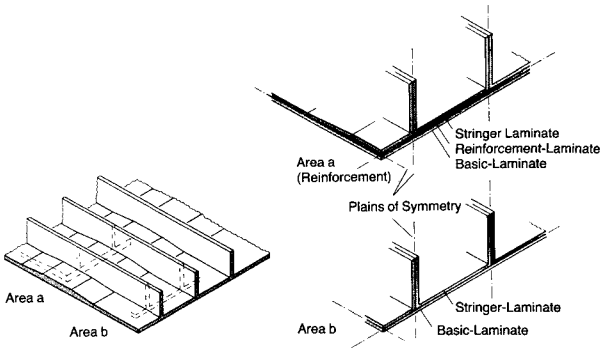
Integrally stiffened CFRP-panel details of lay-up, manufacturing.
